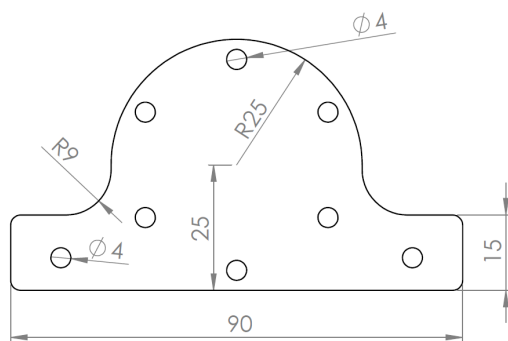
Drawing of the pressure chamber cover and support. Thickness of the part is 6 mm.
